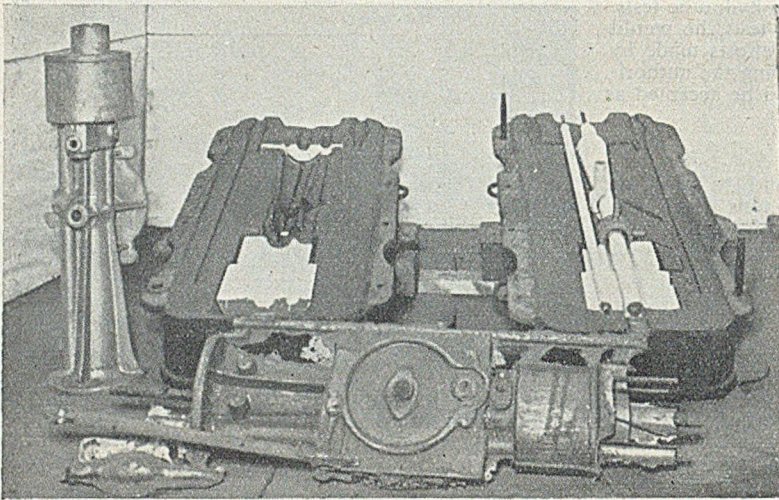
TRANSMITTING CYLINDER, SHOWING MOULD AND CORES, AND ROUGH AND DRESSED CASTINGS.
